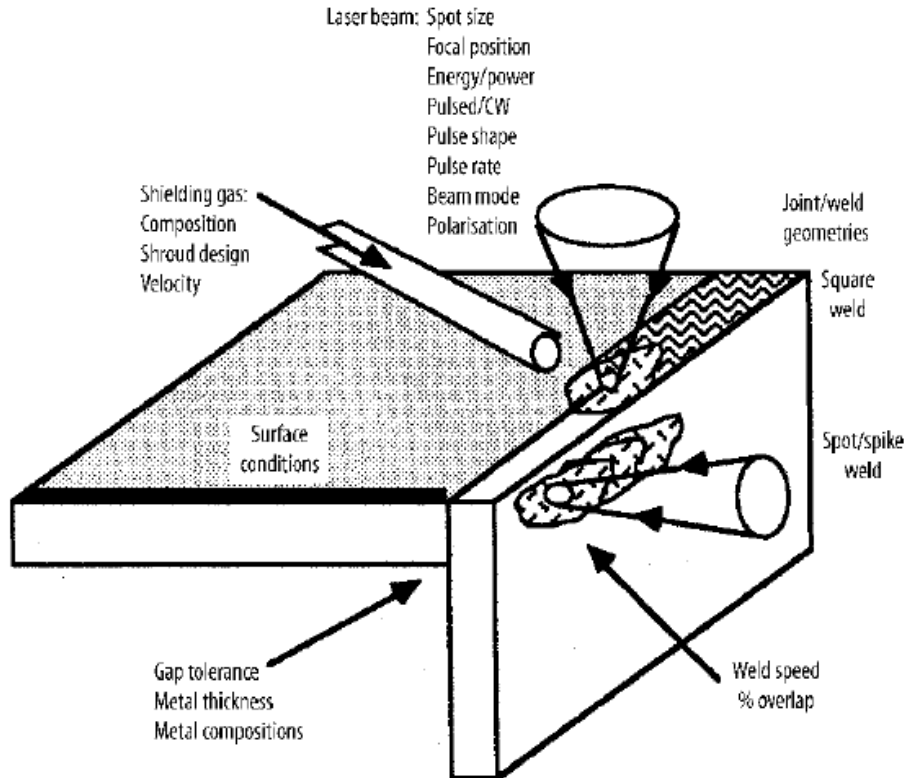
Main process parameters to be controlled in laser welding. [10]
